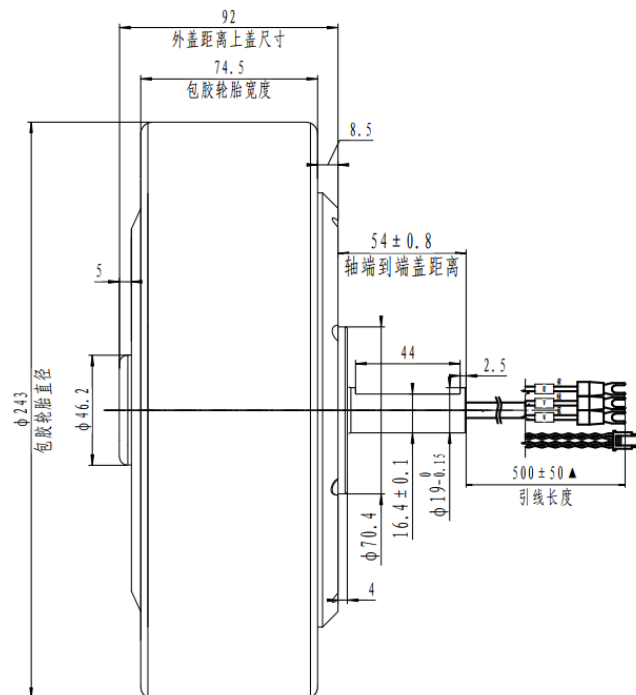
10 inch 30Nm hub motor mounting size
